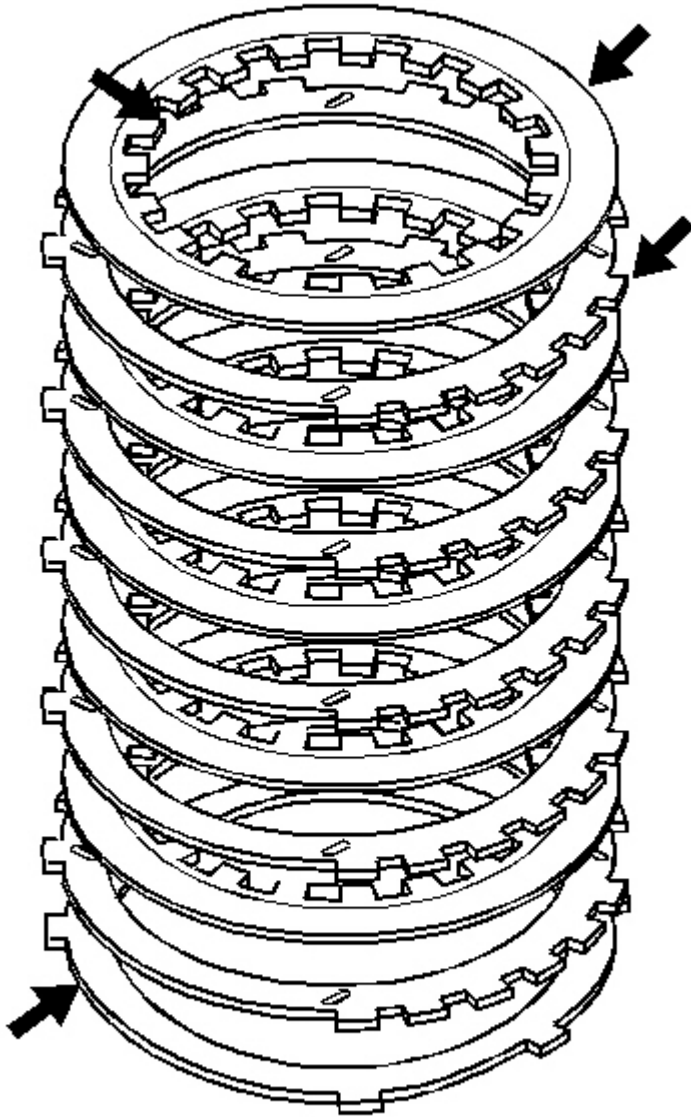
Locating Inspection Areas On Low And Reverse Clutch Plates
